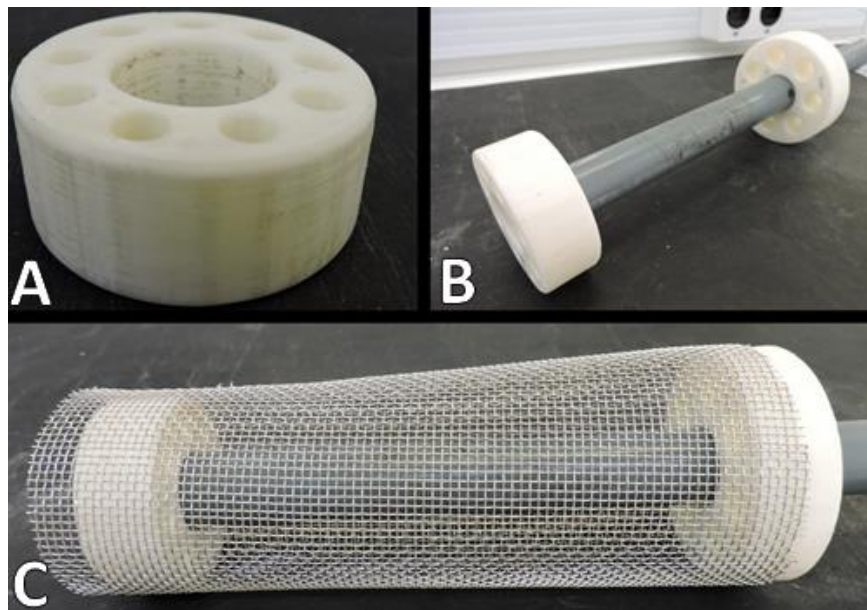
(A) disk with standardized dimensions; (B) mold prepared for placing the stainless steel mesh; and (C) stainless steel mesh shaped into a cylindrical shape using the mold
